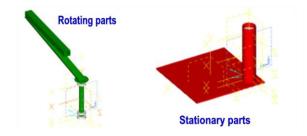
Rotating and Stationary Parts of Lift Assembly.
